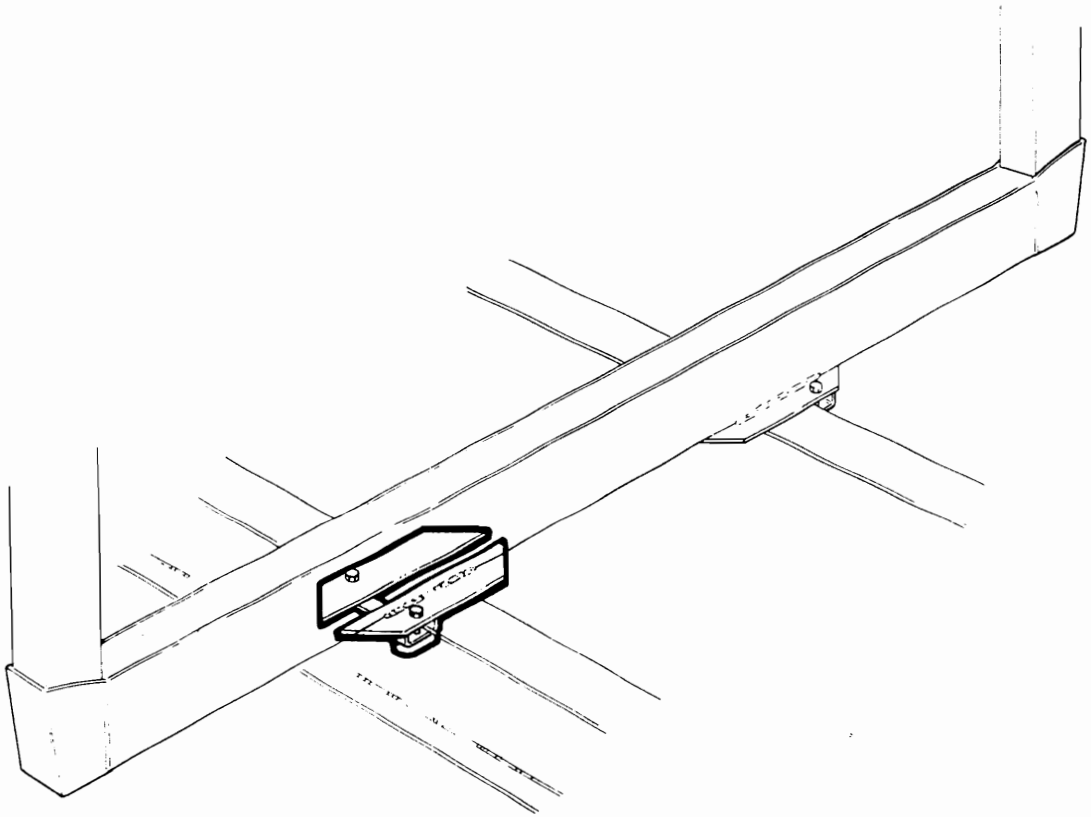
Clamping Fixtures to Mount Complete Bunks on Top of Main Beams Developed by EXTE Fabrics AB, Farila, Sweden: Bolted design (EXTE, no date).
